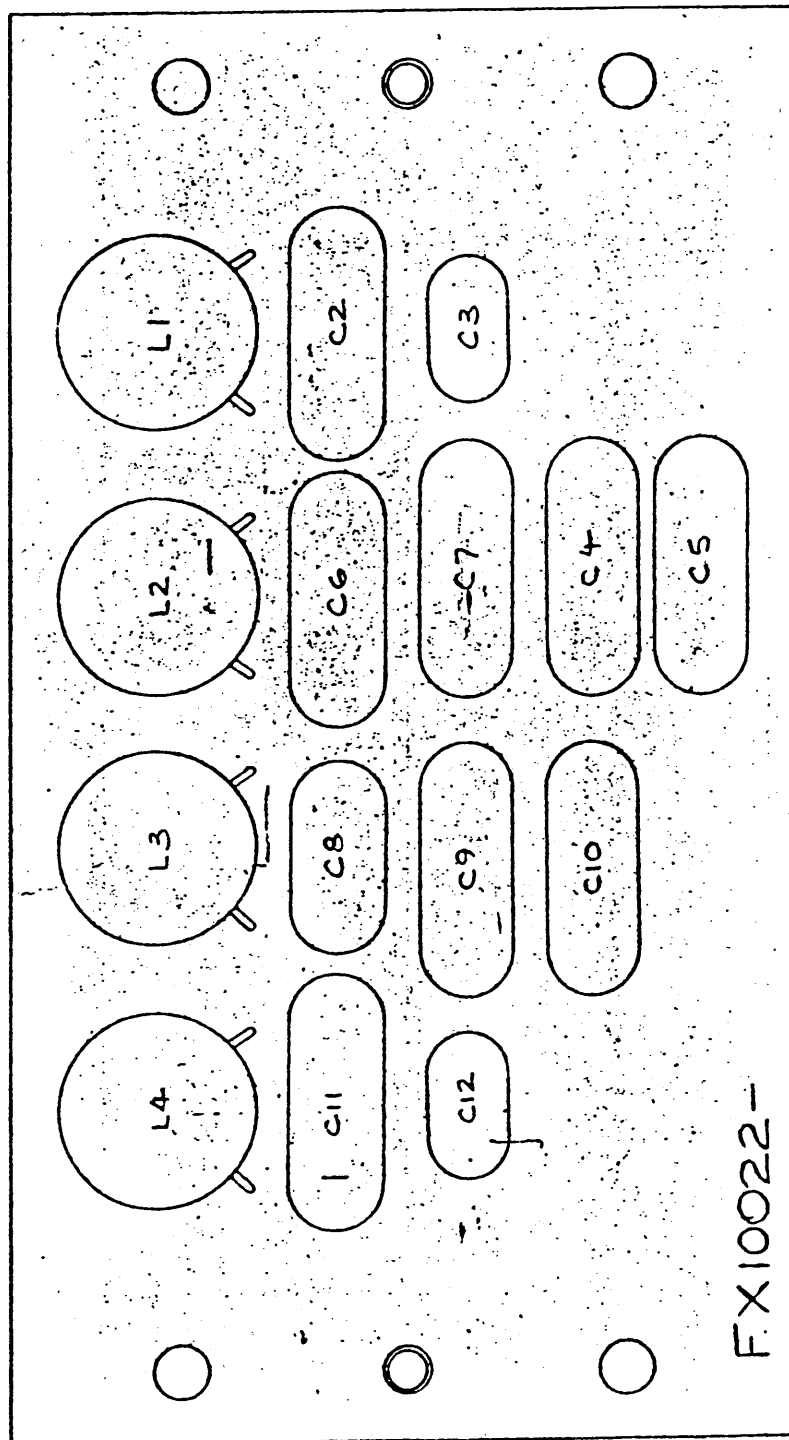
COMPONENT LOCATION, LOW PASS FILTER ASSEMBLY
